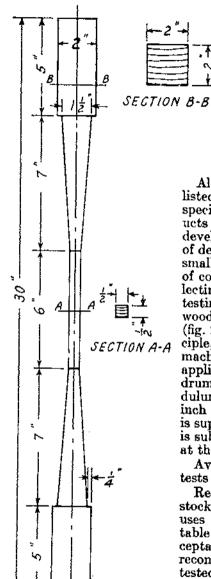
Details of tension-parallel-tograin test specimen.
